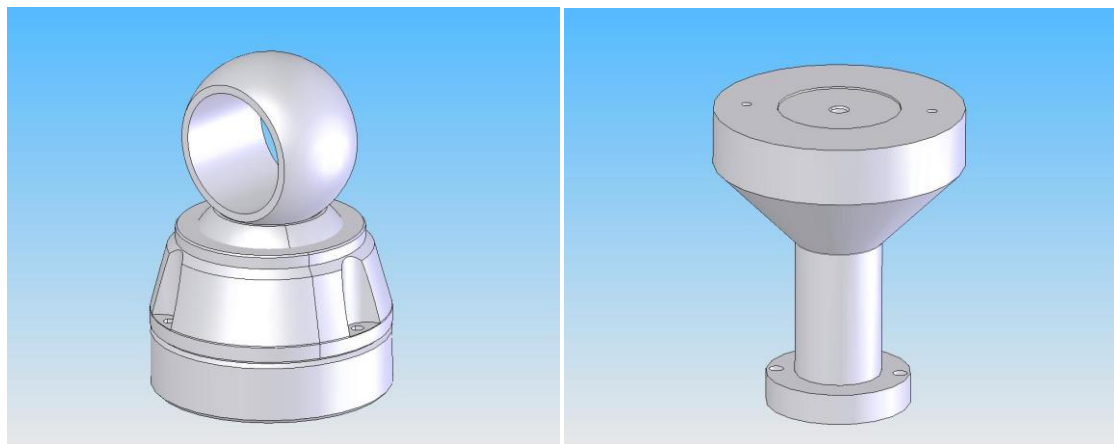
Laser target used for alignment (left) and possible target support (right)
